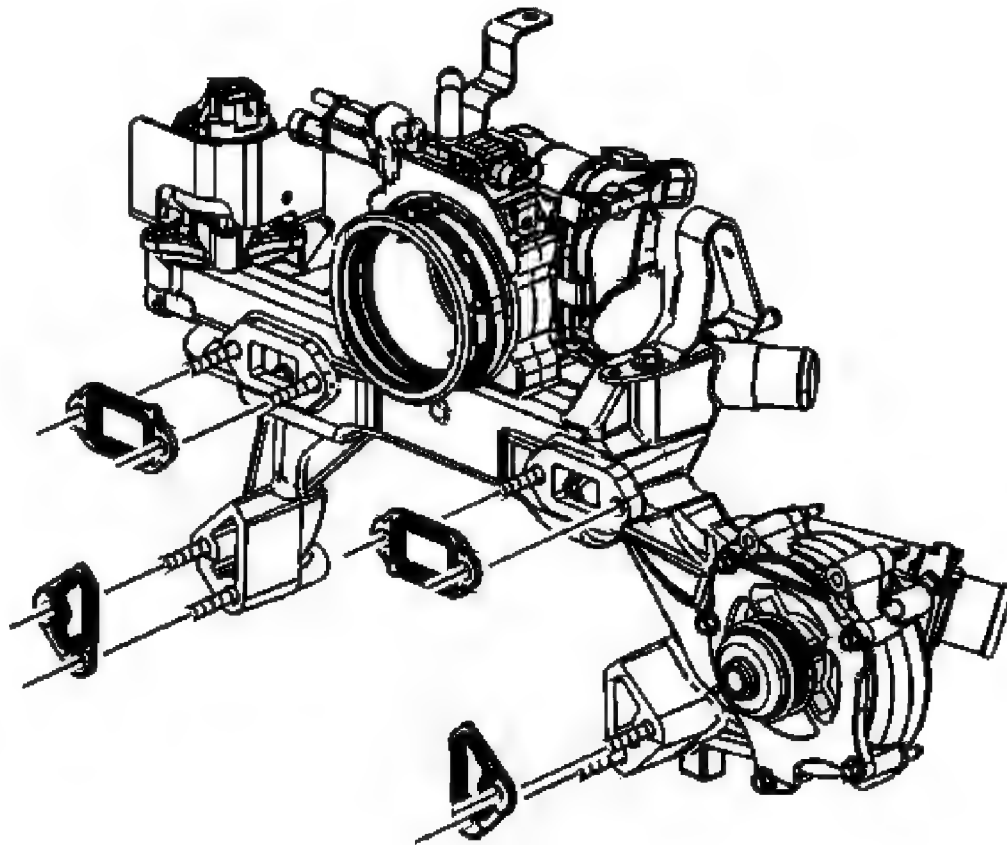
Removing/Installing Water Pump Housing Gaskets & Bolts
